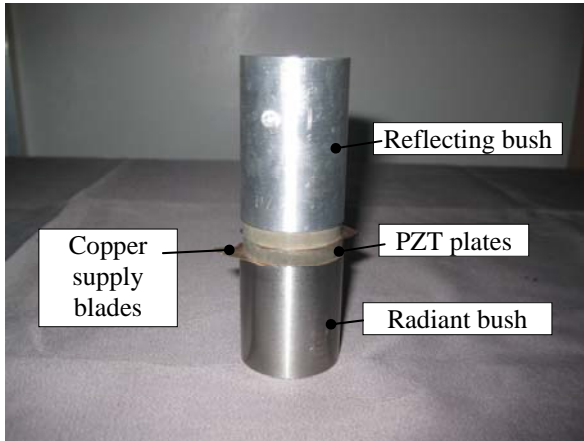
Transducer assembly used in ultrasonic chain for assisted EDM
